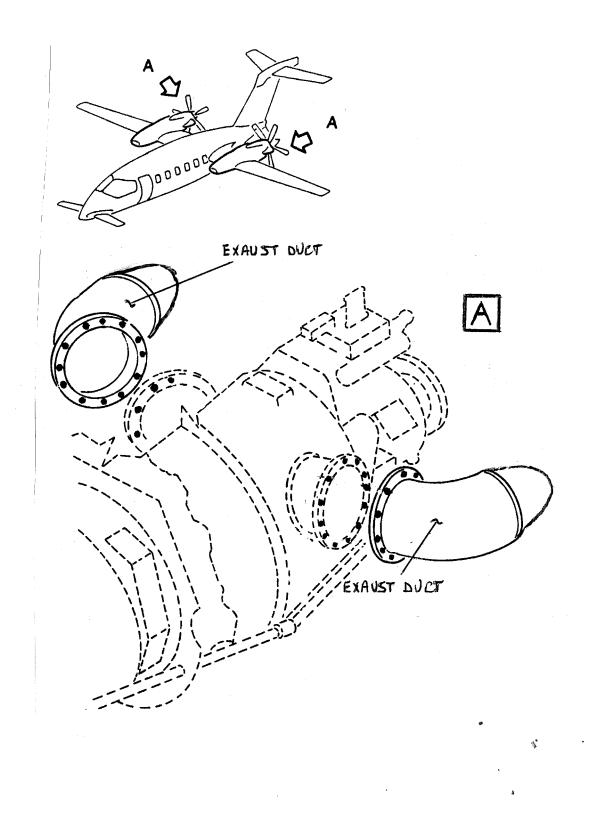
Exhaust Stacks - Removal/Installation (Sheet 1 of 2)
